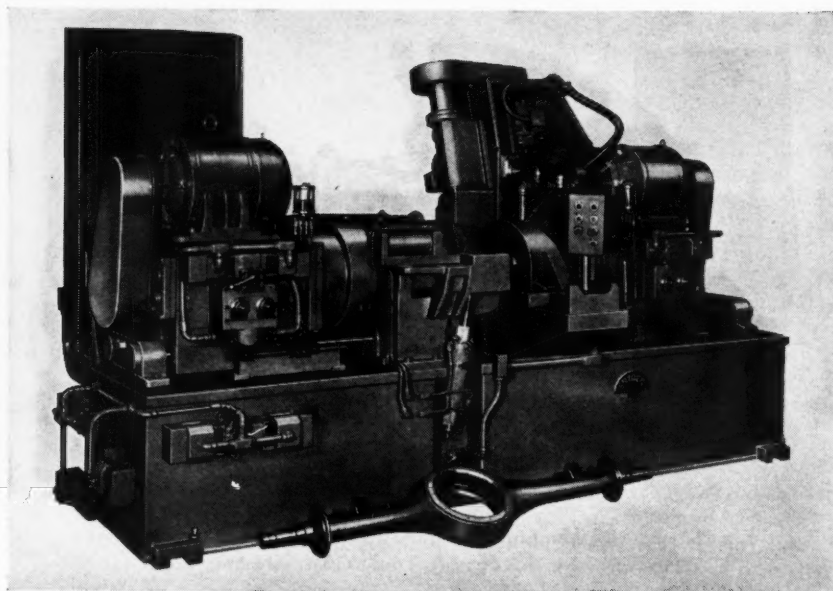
Snyder Special Automatic Machine for Drilling Truck Rear-axle Housings
